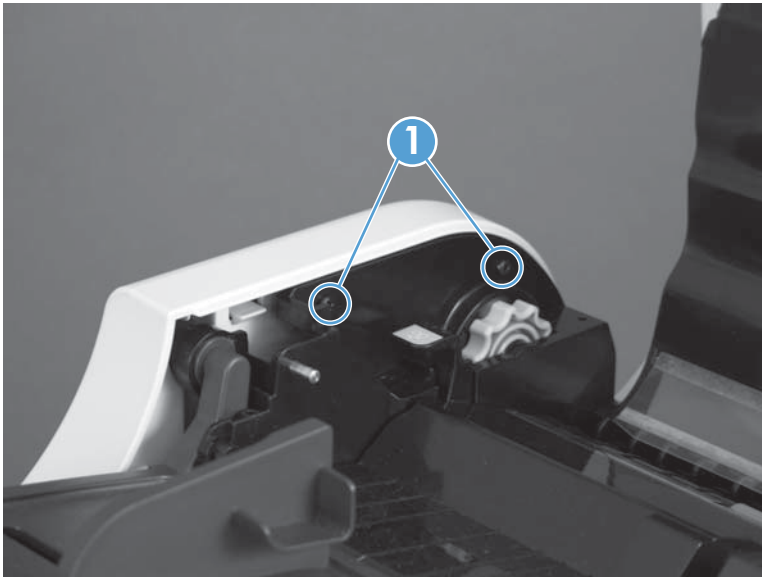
Remove the document feeder front cover (3 of 8)
